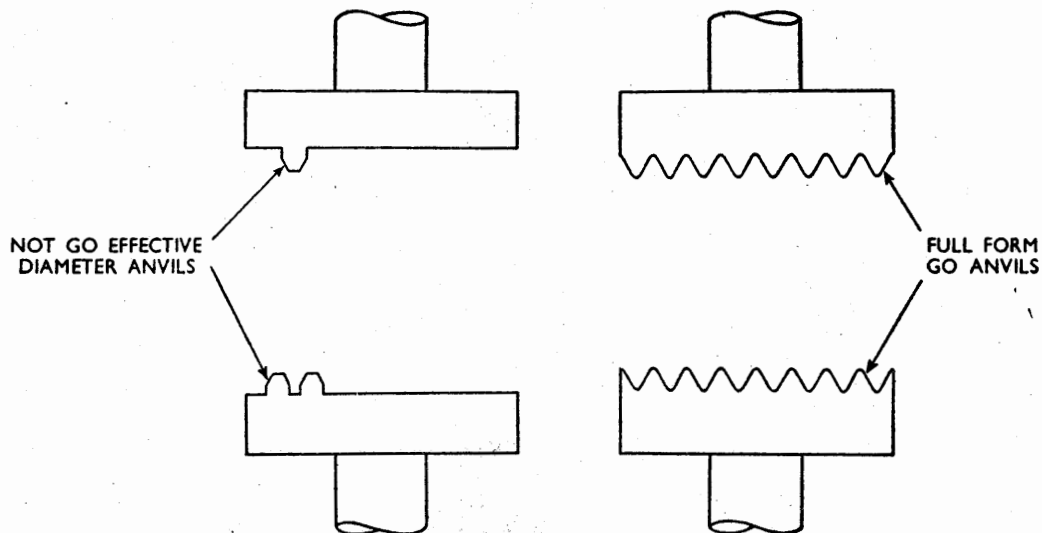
ARRANGEMENT OF CALIPER GAUGES
